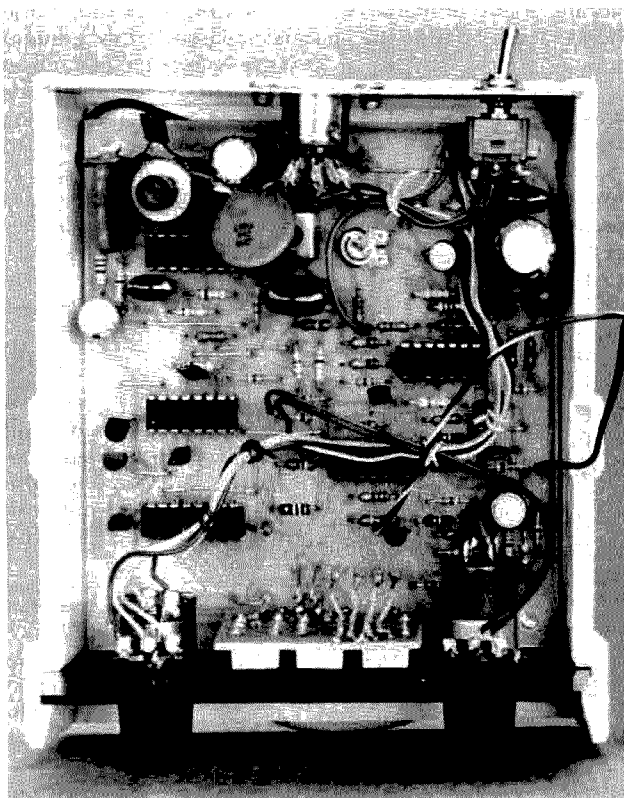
Photo C. Close-up view of the completed PCB assembly. Note that the seven 680-Ohm resistors adjacent to the display board are mounted end on.
